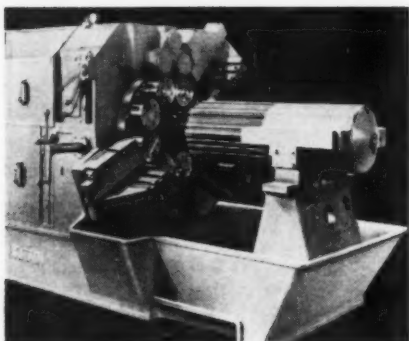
Model 98. Multiple spindle automatic work rotating chucking machine with flat cross slides. Additional forming arms can be attached in the openings which are now covered by circular covers at the top of the machine. Note extremely wide open and accessible tooling area which is one of the advantages of the open-end chucking machine.
